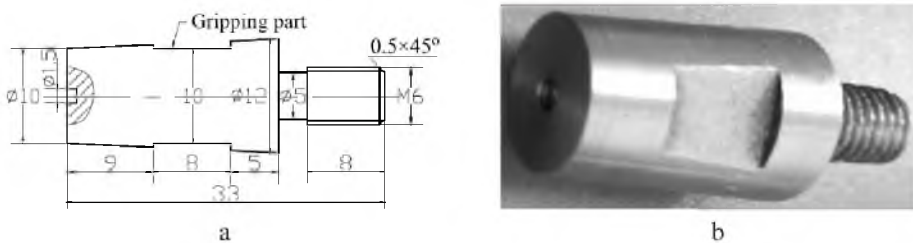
Tool head circular hole: (a) tool head overall dimensions (unit: mm); (b) tool head.
